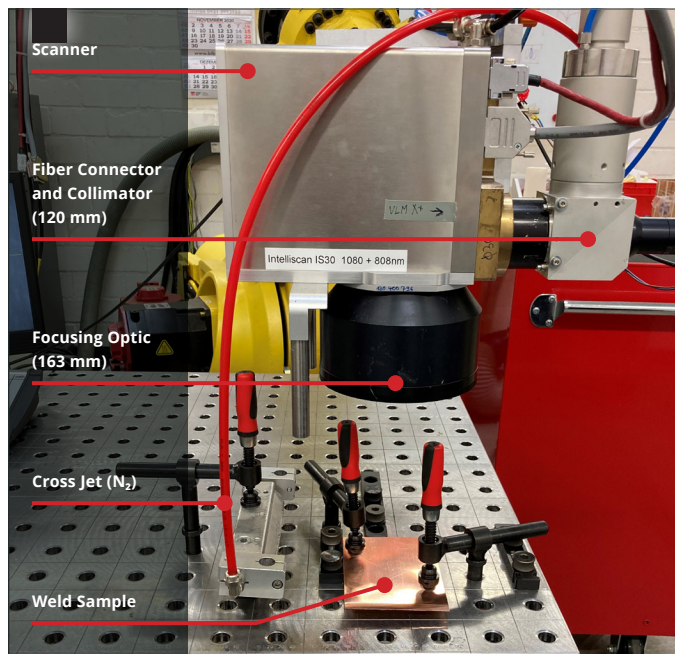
Single mode ARM fiber laser weld station with scanner and shielding nozzle
